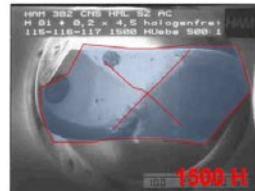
NP 175F TL diameter 0.2 mm drill wear
